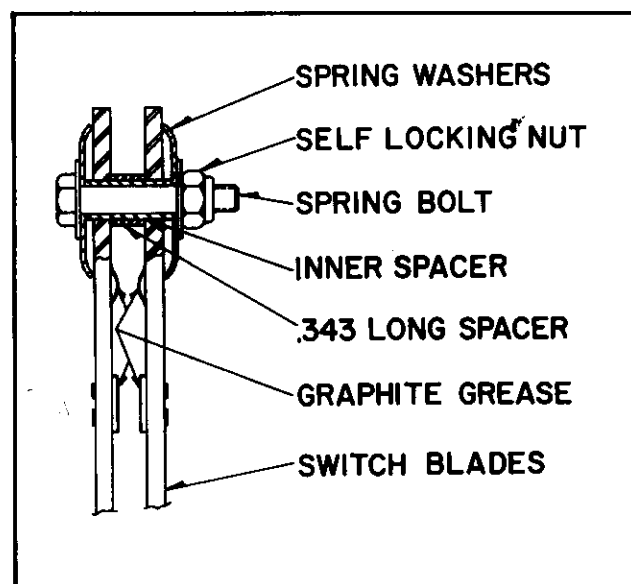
Main Contact Assembly (Dwg. 3497C98)
